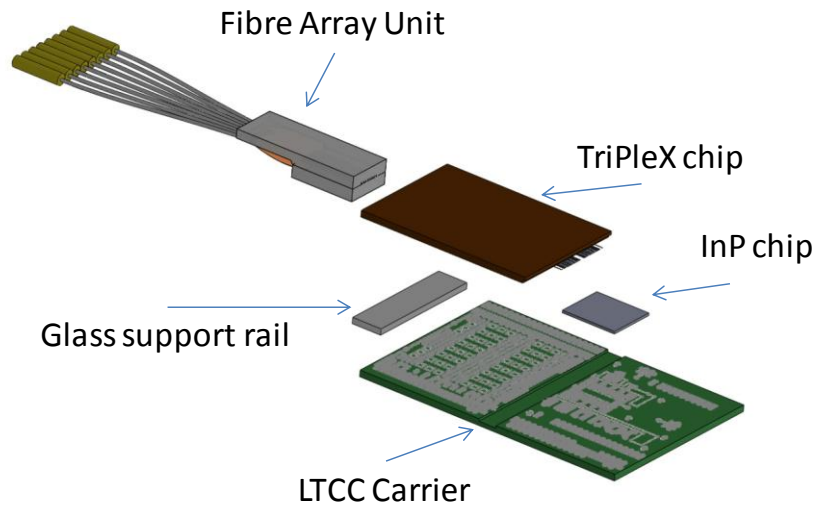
Exploded drawing of assembly showing the piece parts required - Fiber array unit (FAU), TriPleX chip (backside view), glass rail for mechanical FAU support, InP chip (backside view), LTCC carrier (top view).
